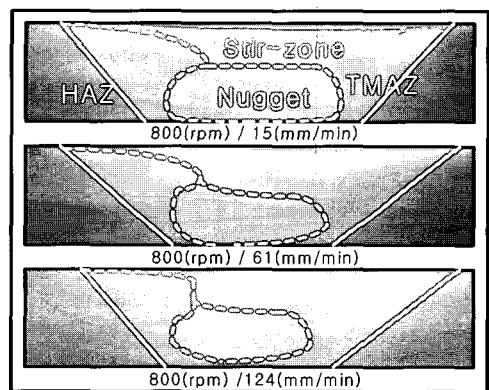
Welded transverse cross-section macrostructures according to the welding speeds and the transition speeds with half screw type tool(H1-H9) of shoulder dia. 20φ mm, pin dia. 4φmm, pin length 6mm.
